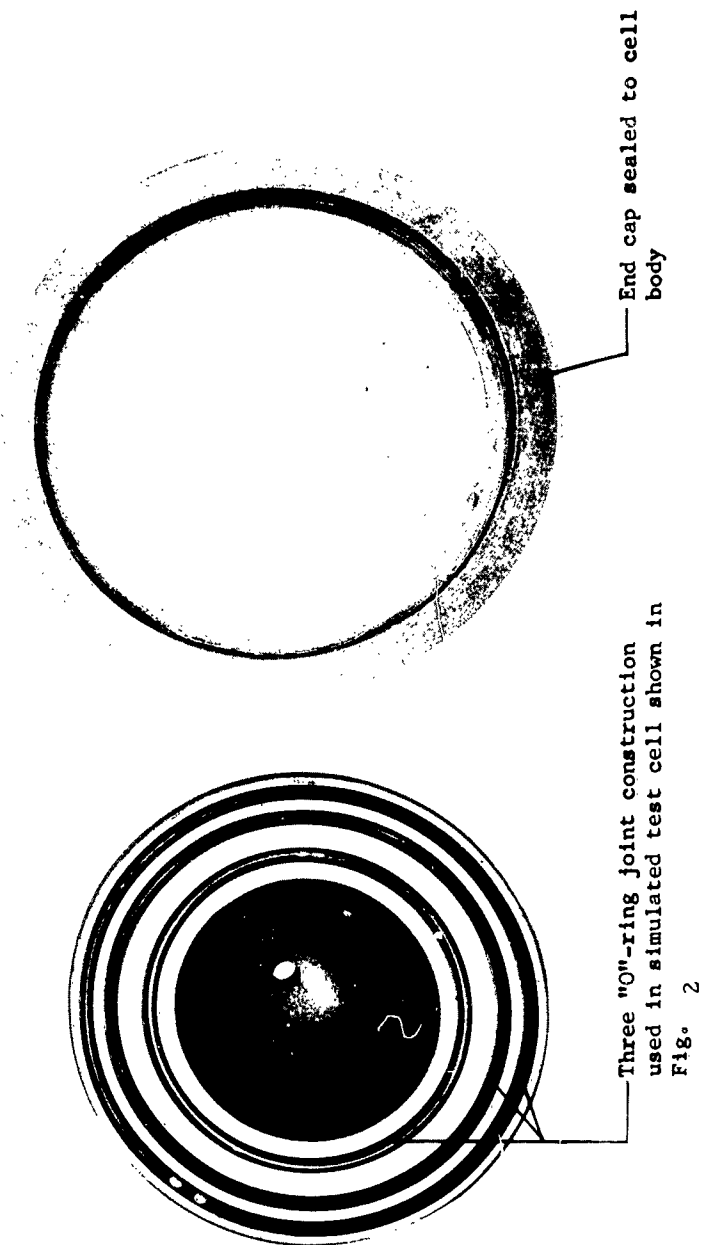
Test Cell System Leakage Determination Tests Using Various Joint Constructions (Three "O"-ring Joint Construction)
